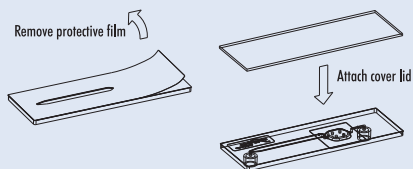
Principle set-up of chip and double-sided adhesive tape
